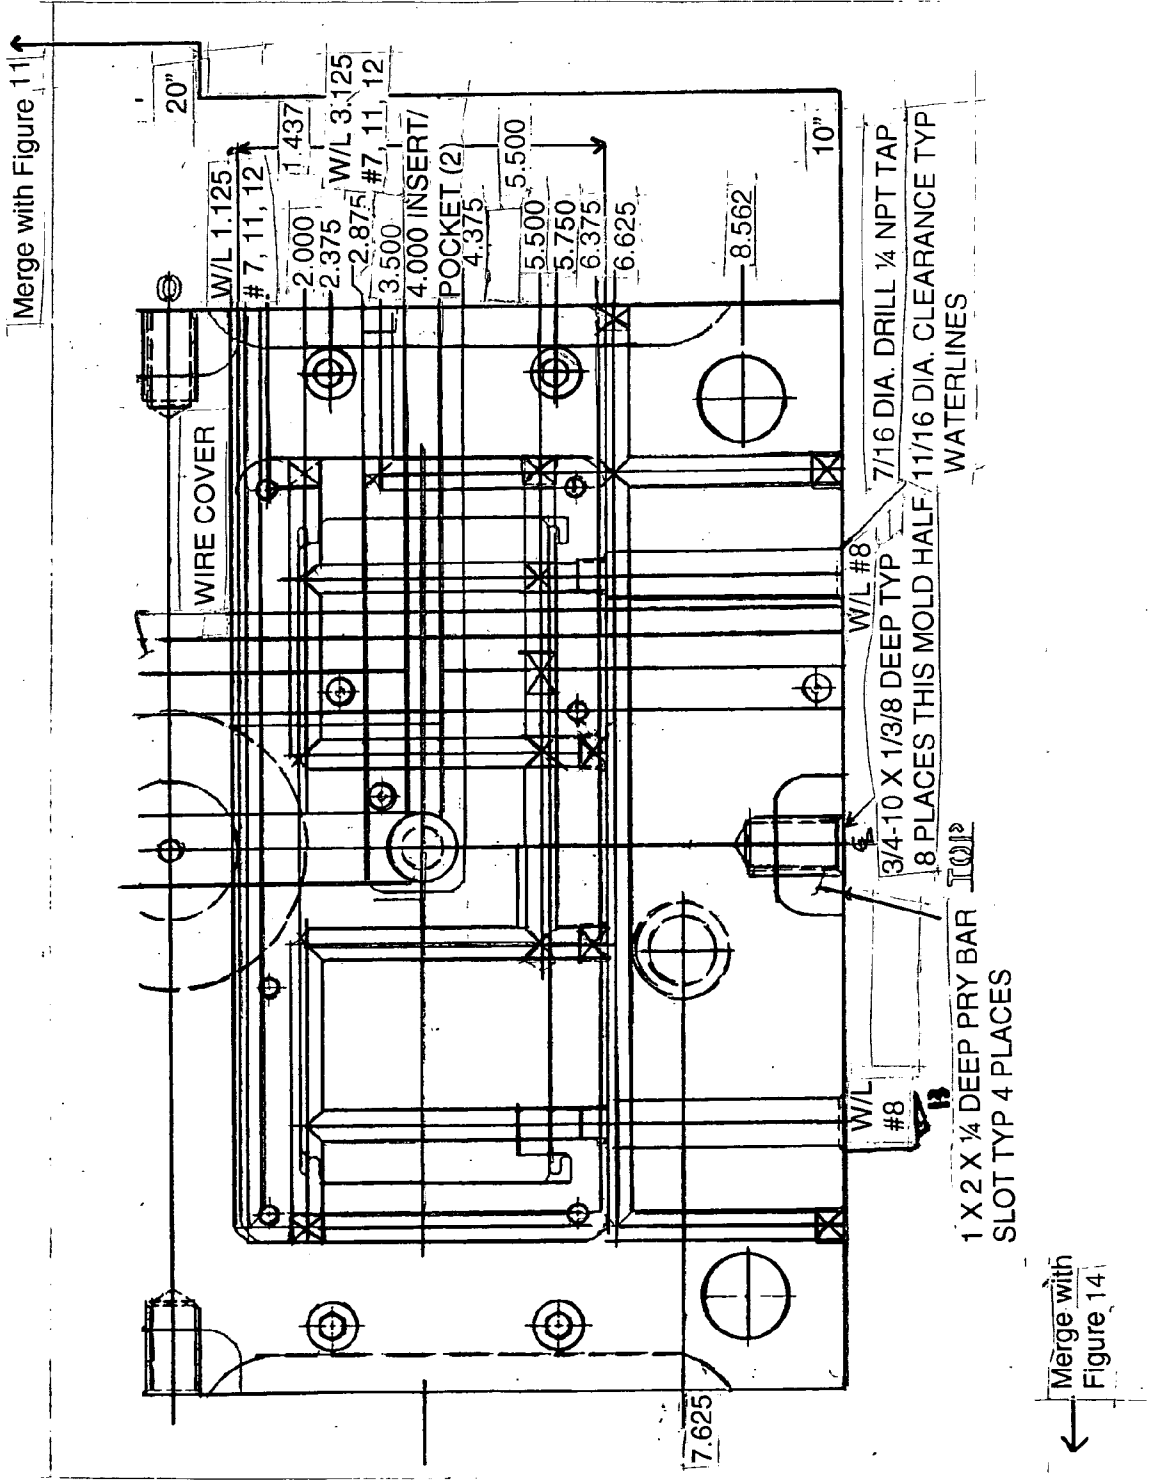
Plan Views – Two Cavity Injection Molds for Top and Bottom Housing, Page 1 of 2, Ejector Half
